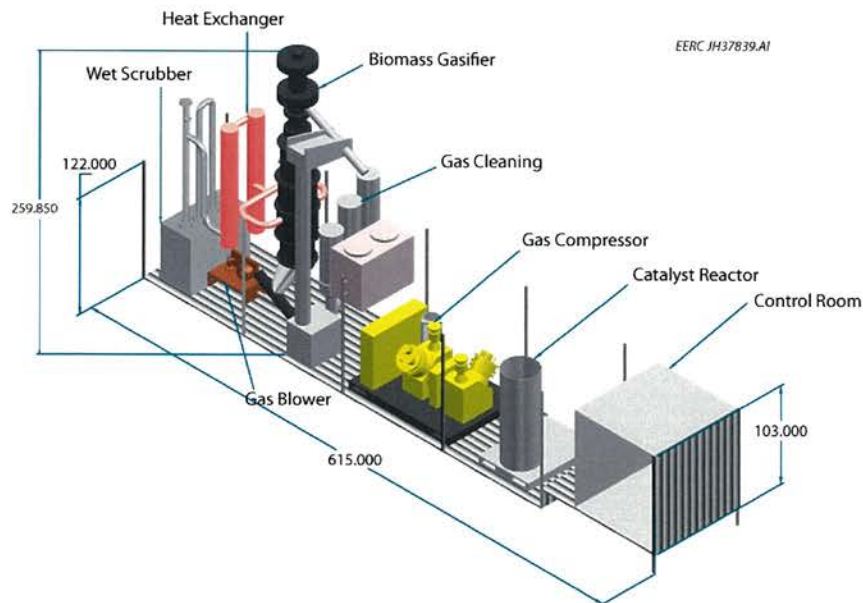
3-D drawing of trailer-mounted gasification system. The trailer roof has been removed for this depiction only. Lengths are in inches.
